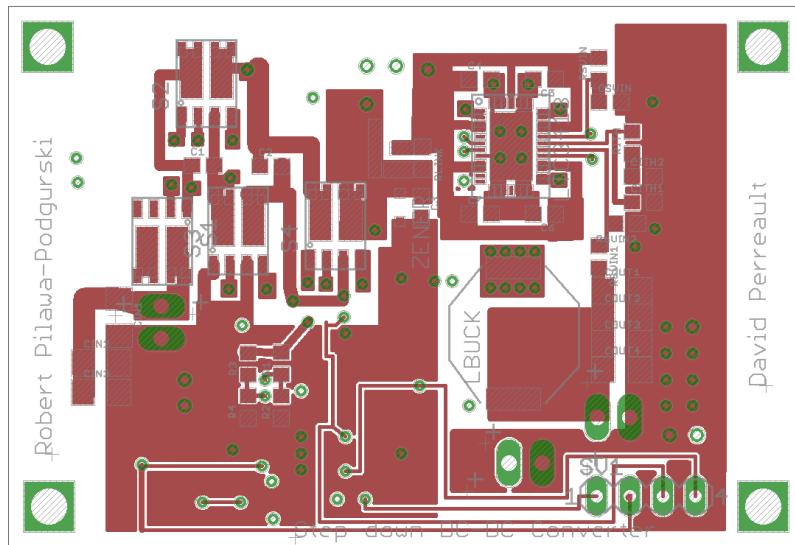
Converter PCB layout, top copper, silkscreen, and solder stop layers.
